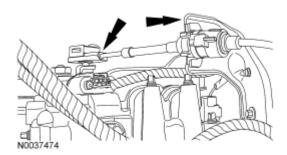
Locating Transaxle Control Cable From Control Lever Courtesy of FORD MOTOR CO.
